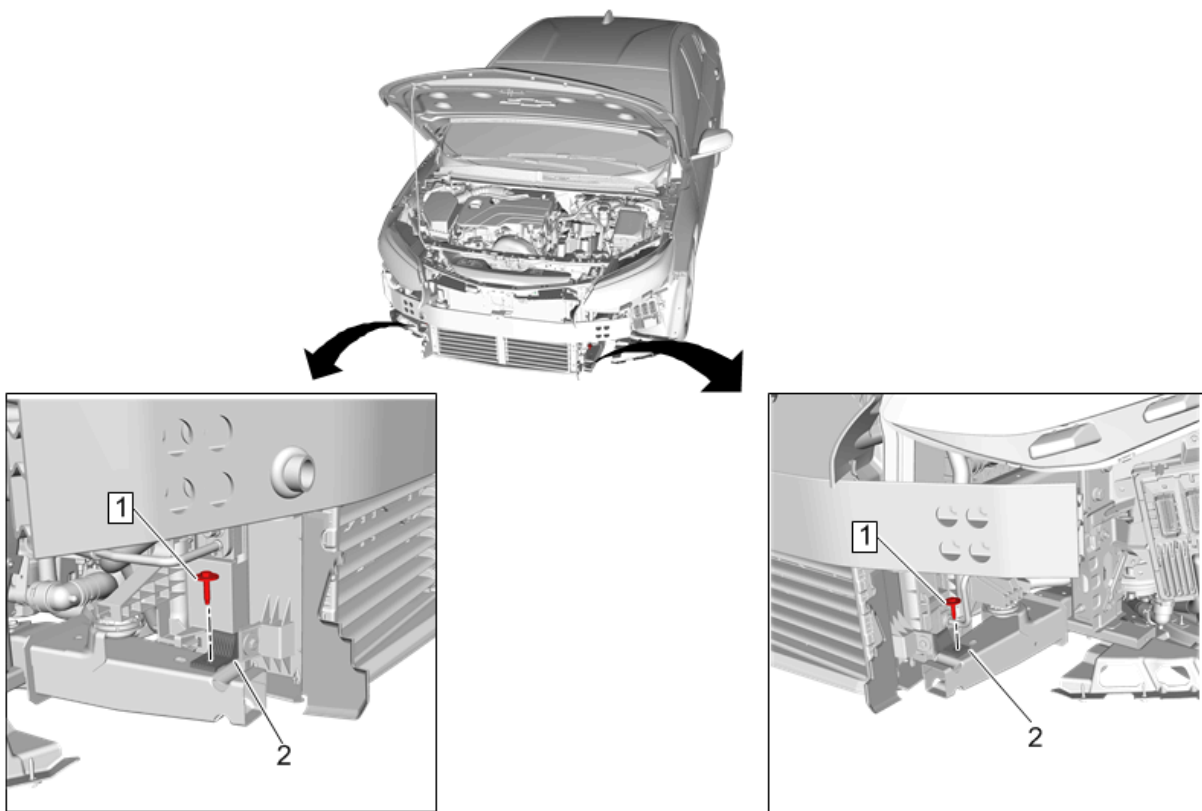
Radiator Air Side Baffle Bolt And Radiator Air Lower Baffle Bracket
